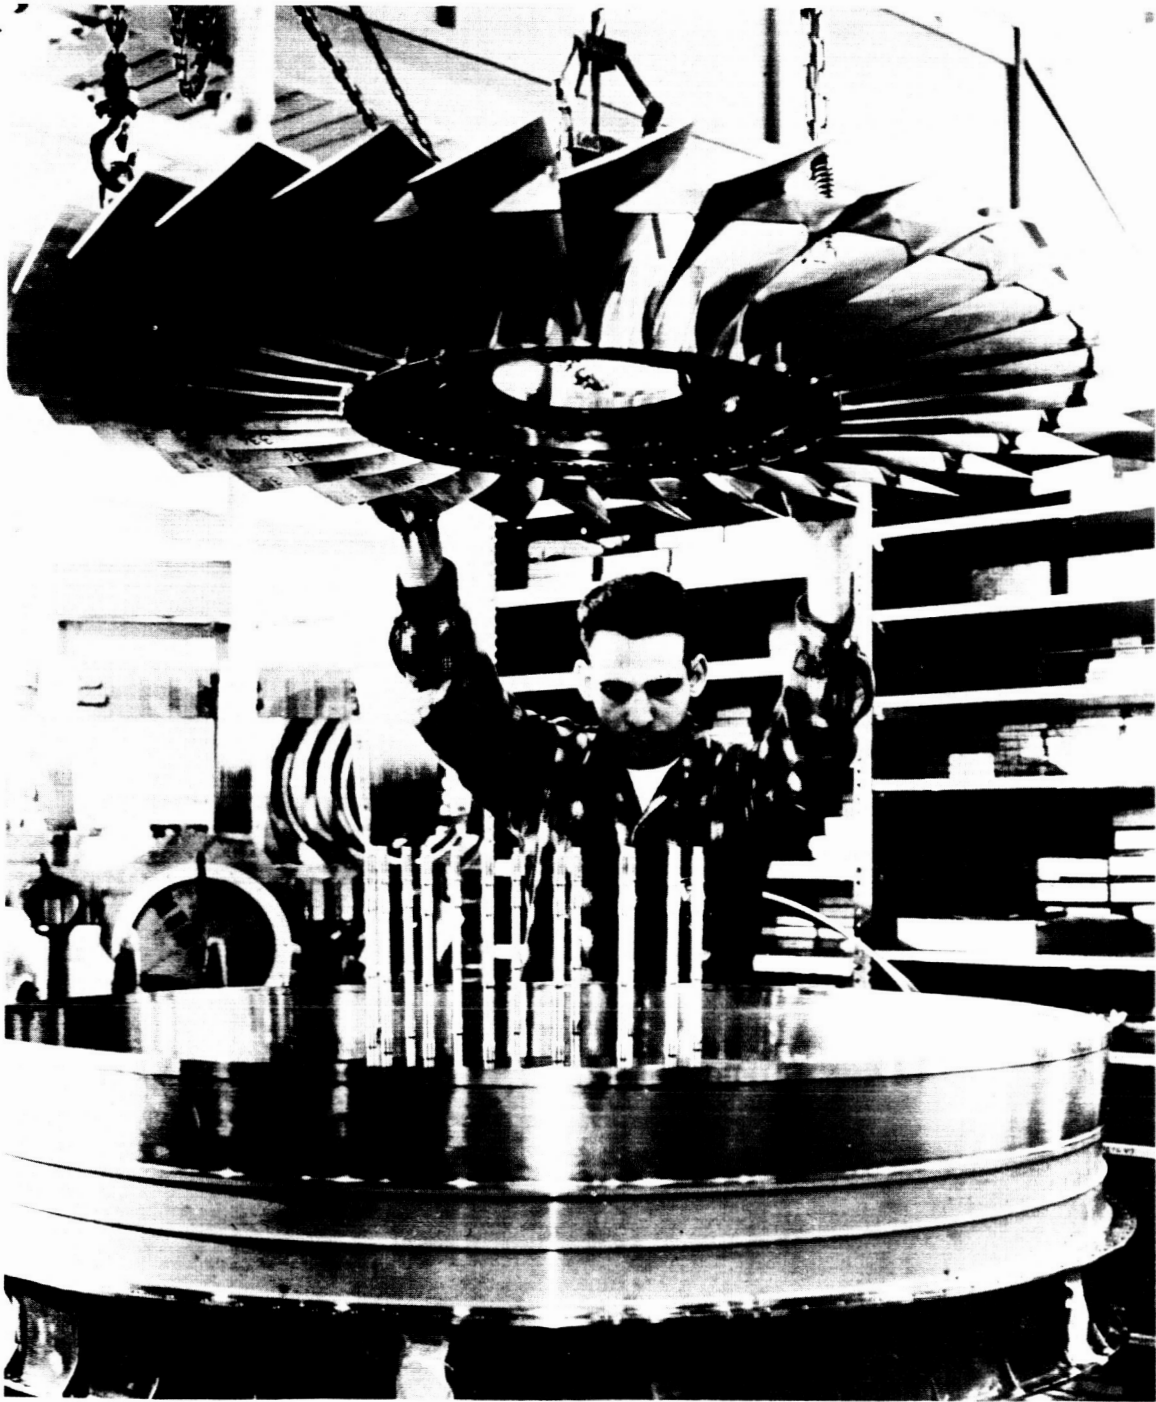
COMPRESSOR SECTION OF JET AIRCRAFT ENGINE WITH BLADES, DISKS, AND SPACERS PRODUCED FROM Ti-6Al-4V ALLOY (REF. 27)
